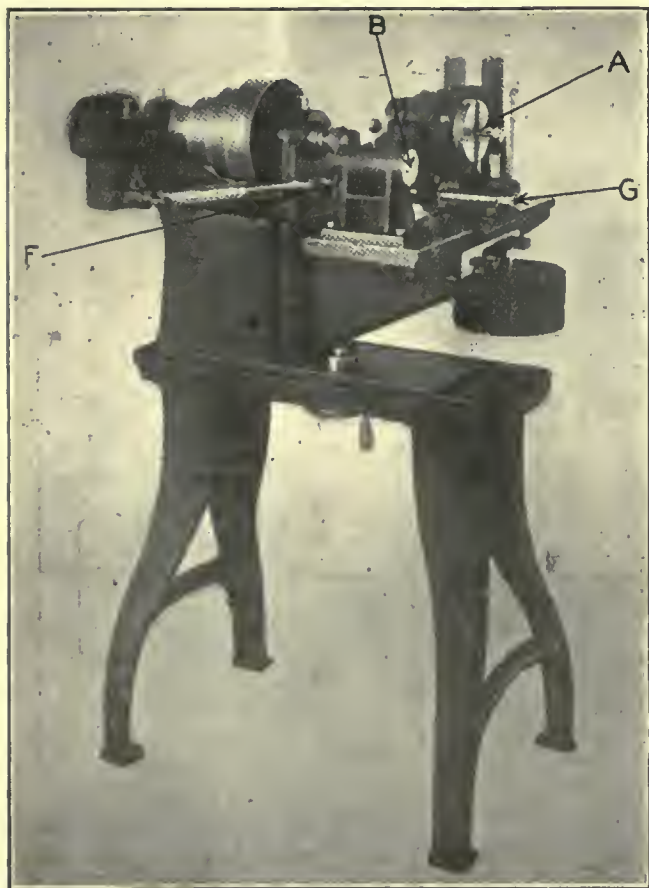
6-INCH CAM CUTTING MACHINE.
